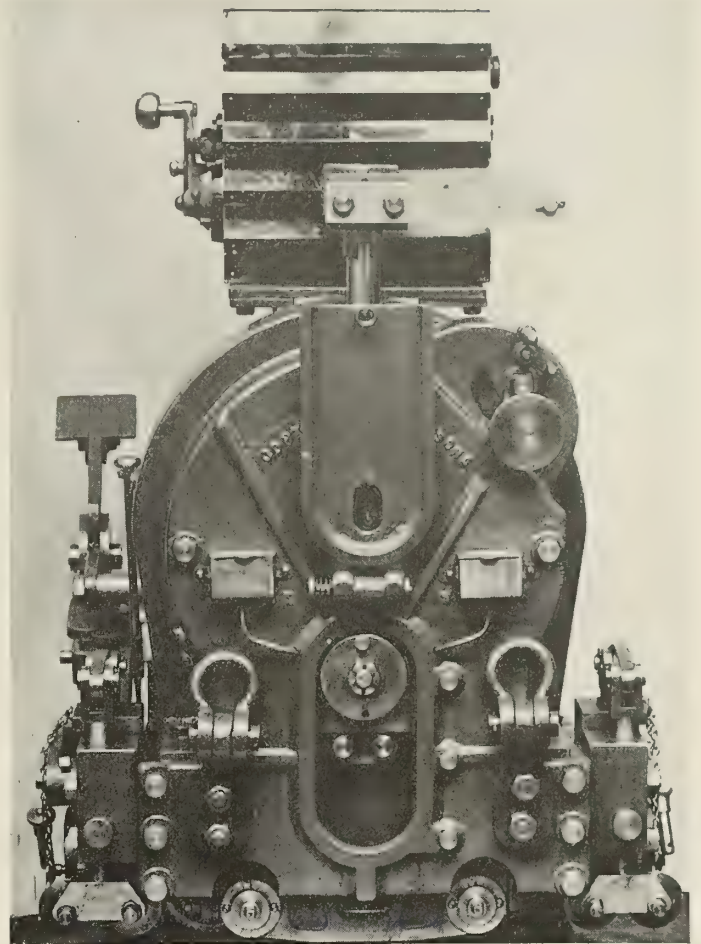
Rear View of Calking Machine, Showing Fluted Rollers and Cross Travel Gear
